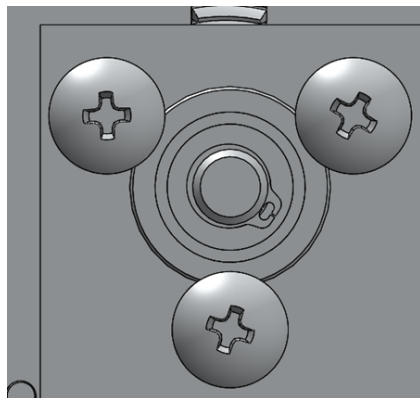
Section view of the $600\ \mu\text{m}$ free play between the c-block and sidewall connecting fasteners.
